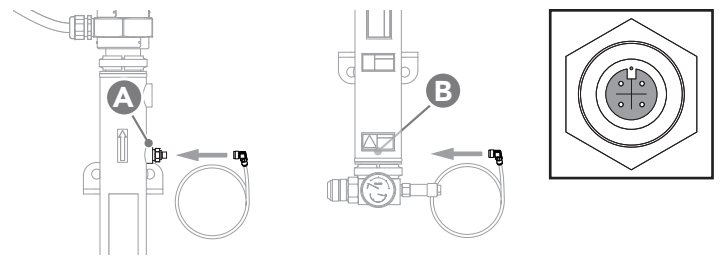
Tank assembly showing high-limit RTD (A) and control RTD behind heating tank assembly (B). Note RTD notch position (inset).
